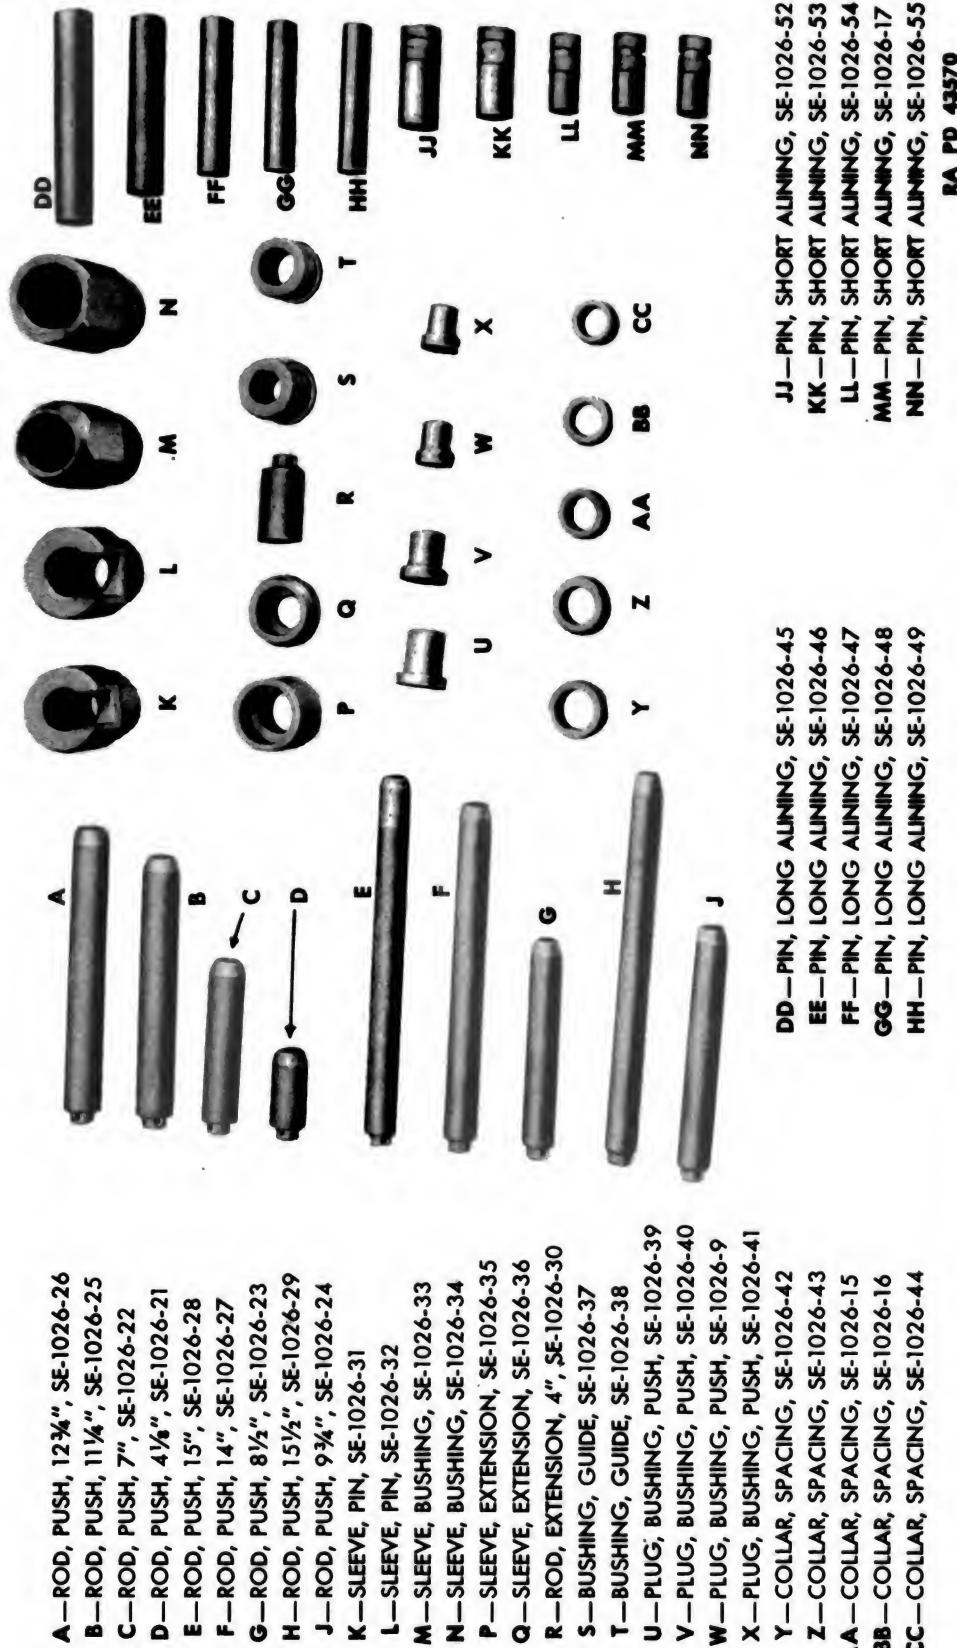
Parts for SE-1026 Portable Hydraulic Track Pin and Bushing Press with Adjustable Head
